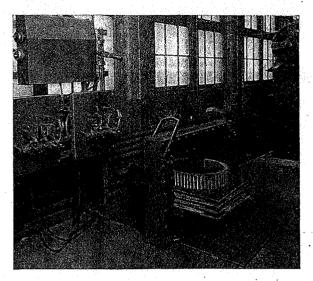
Transformer Method for Heating Gear Rims Uniformly
